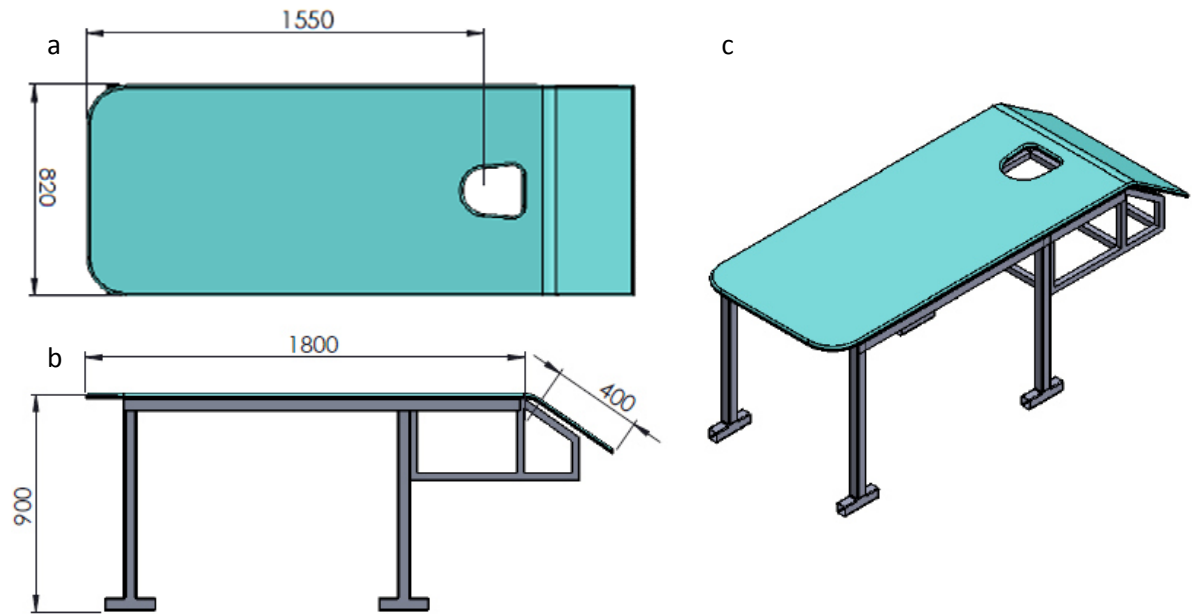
Overall dimensions of DIET surface: a) Top View, b) Side View, and c) Isometric View
